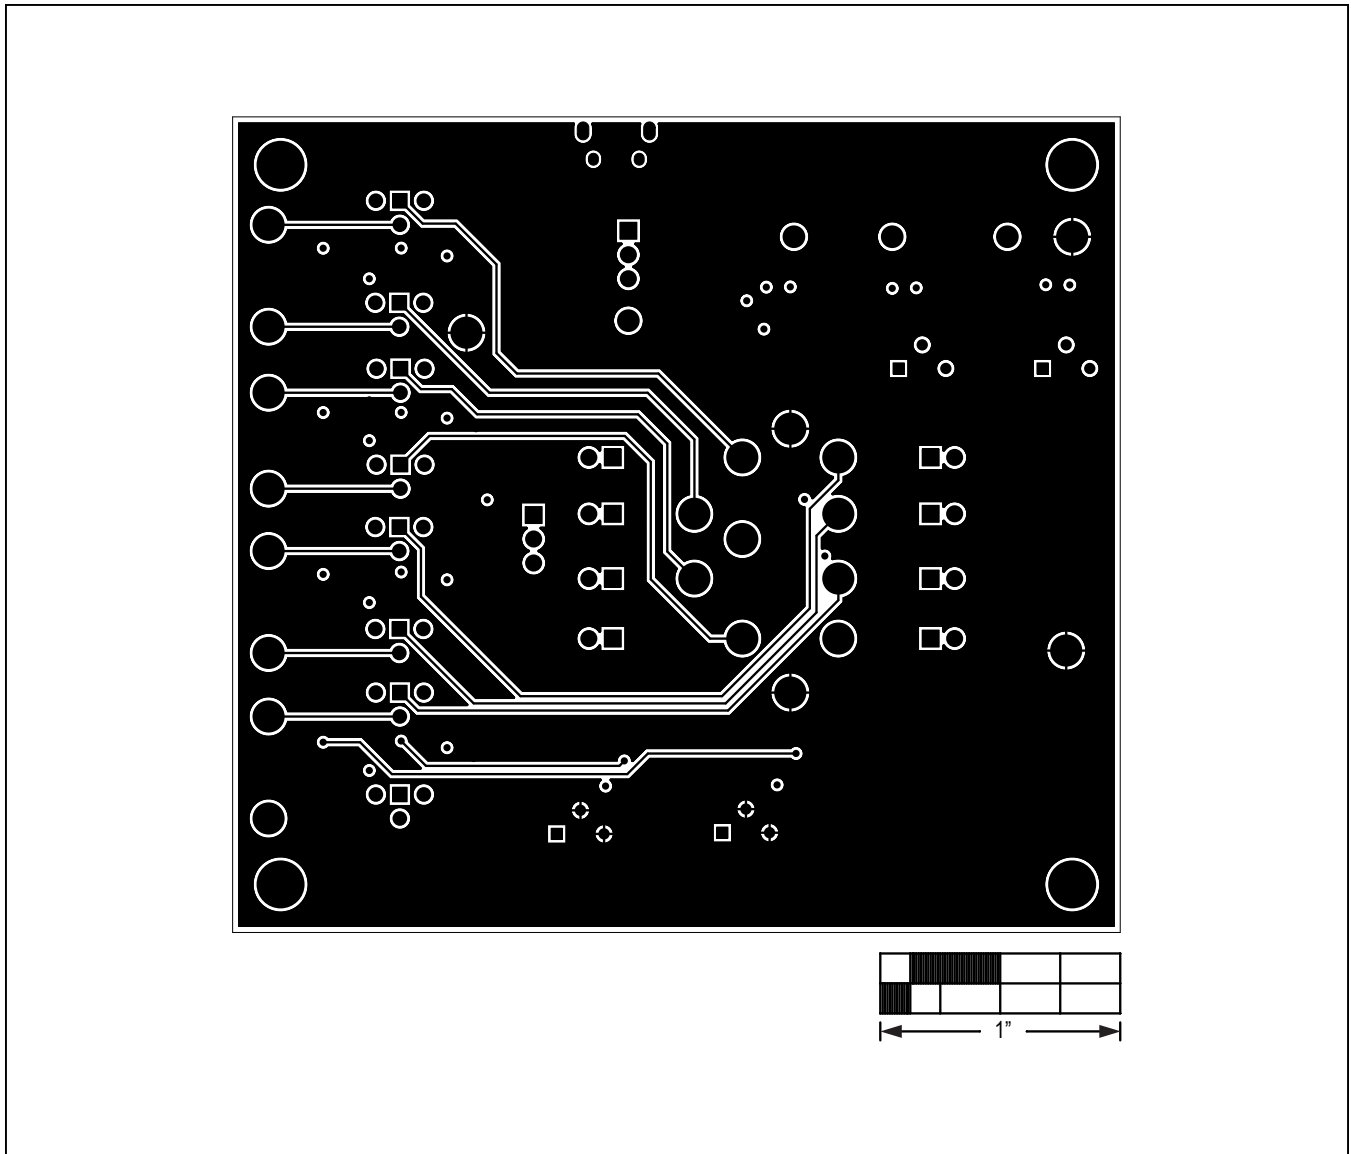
MAX14611 EV Kit PCB Layout—Solder Side
